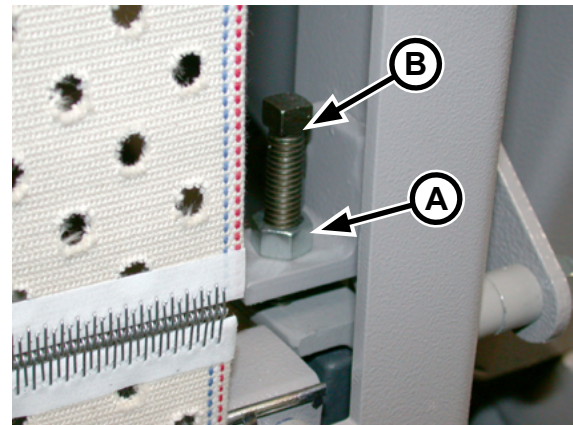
Loosen the locknut and adjust the roll equally on each side.
